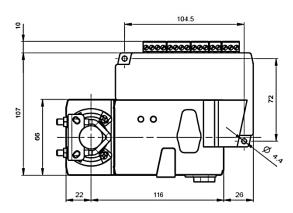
Dimensions: GYY-LMV-BAC-002 (mm)
